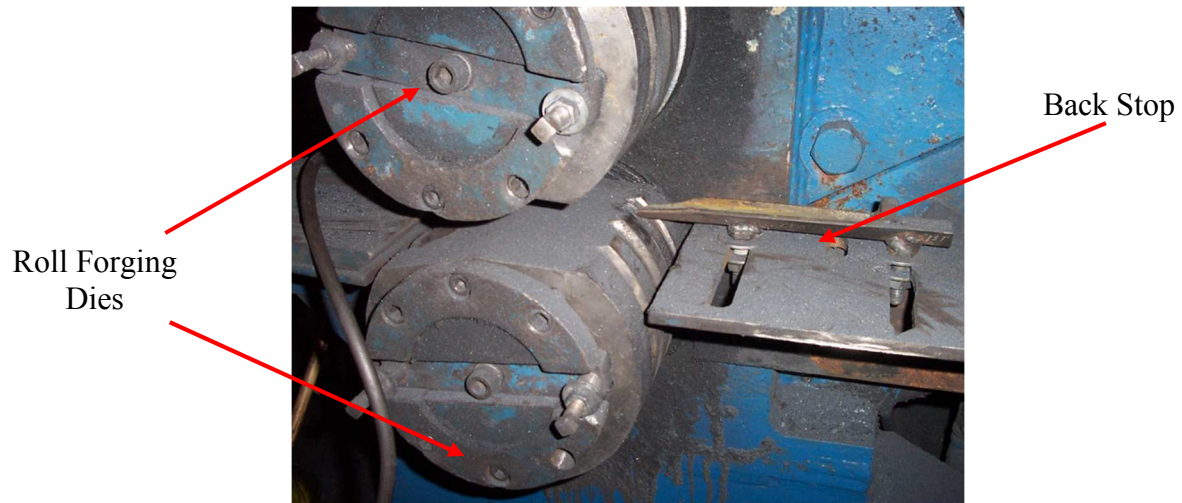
Roll forming die set – up for the existing wrench forging process
